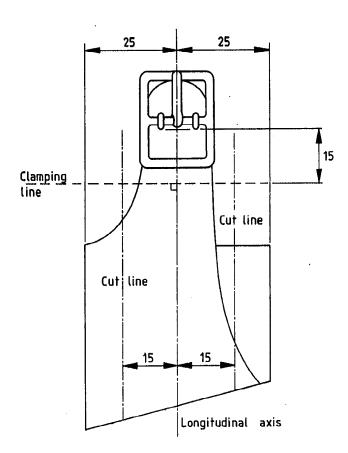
/3b. Type A test piece cut from the upper of figure 5.11/3a (Because of the dimensions of this integral strap the test piece is not 30 mm wide at the clamping line.)
